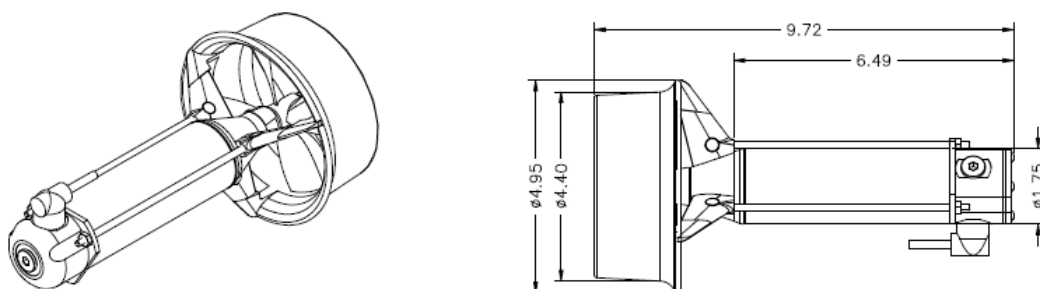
Seamor Marine – 150 W Thruster (Dimensions in inches)
